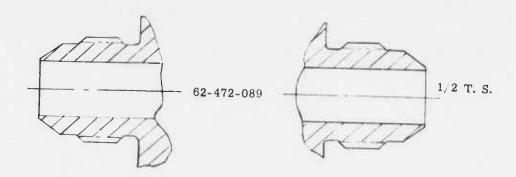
Cross Section - Valve Assembly - 1000 PSIG Service 62-472-087, 62-472-088, 62-472-089
